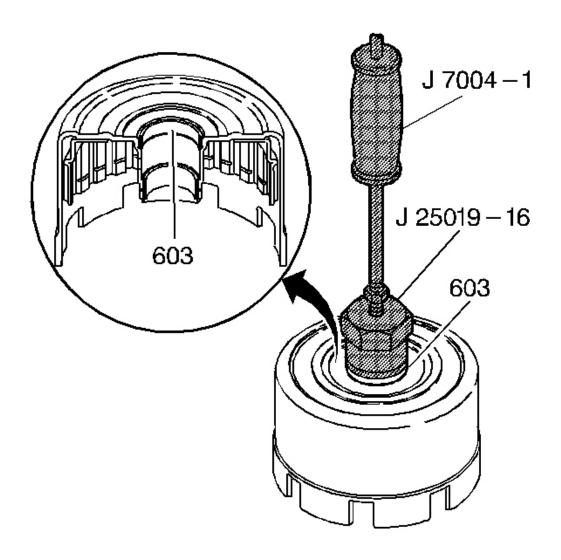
Identifying Reverse Input Clutch Front Bushing Courtesy of GENERAL MOTORS CORP.
